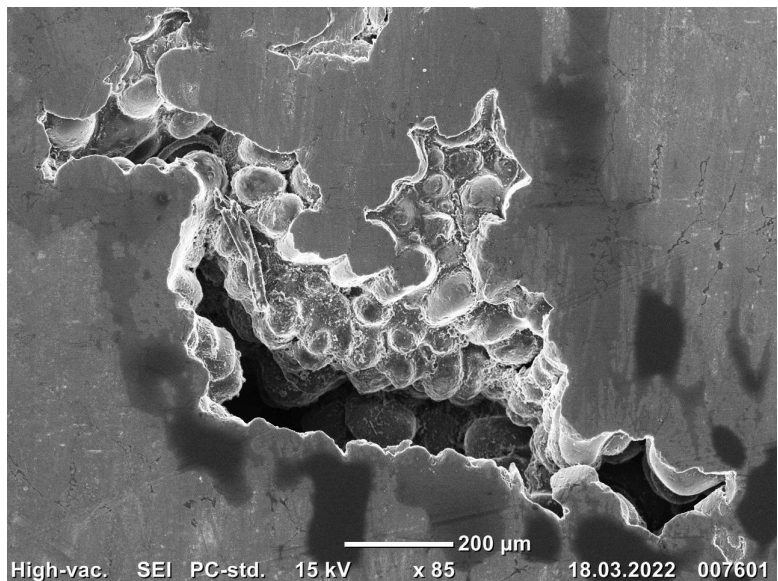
Weaves and cavities caused by casting shrinkages in the sample of geometrical shaped filter PO48 - 25052 (20x36L). Zoom = x13. SEI. Parallel 2. High-Vacuum.
